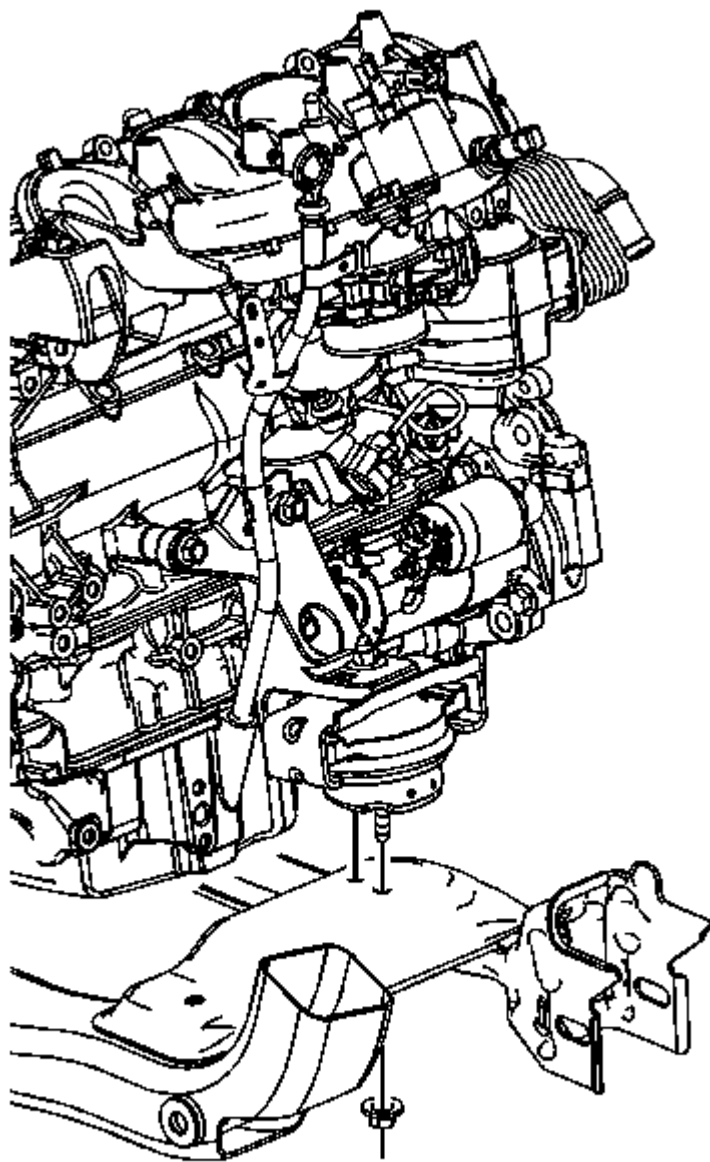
View Of Driver Side Engine Mount-To-Frame Lower Nut
